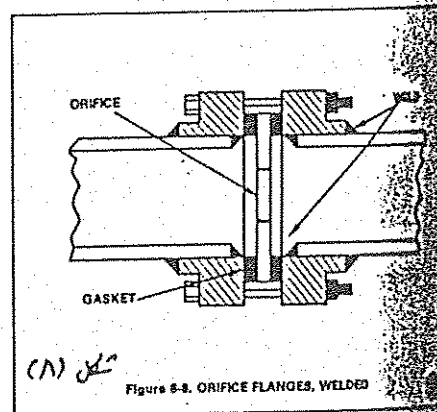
ORIFICE FLANGES, WELDED
